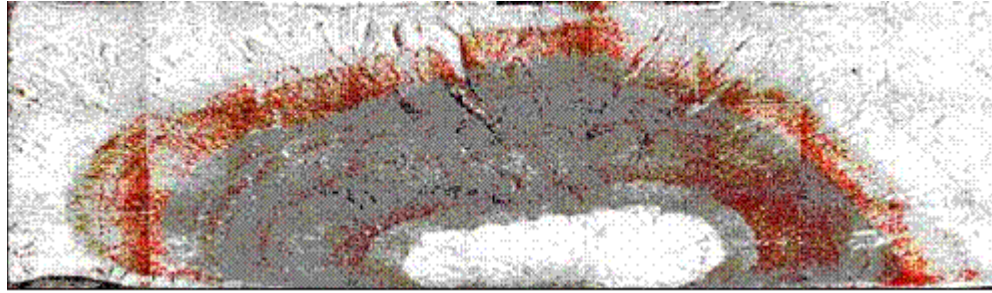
Through-wall crack in a CANDU Zr-2.5 Nb pressure tube, showing oxidized crack growth bands. The crack initiated at the inside surface just inboard of the rolled joint.
